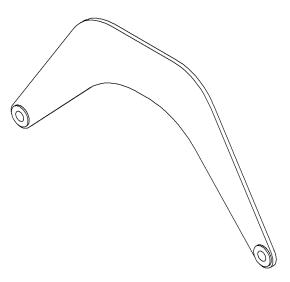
Mid-point suspension spacer bracket on main boom after the attached reducing piece
